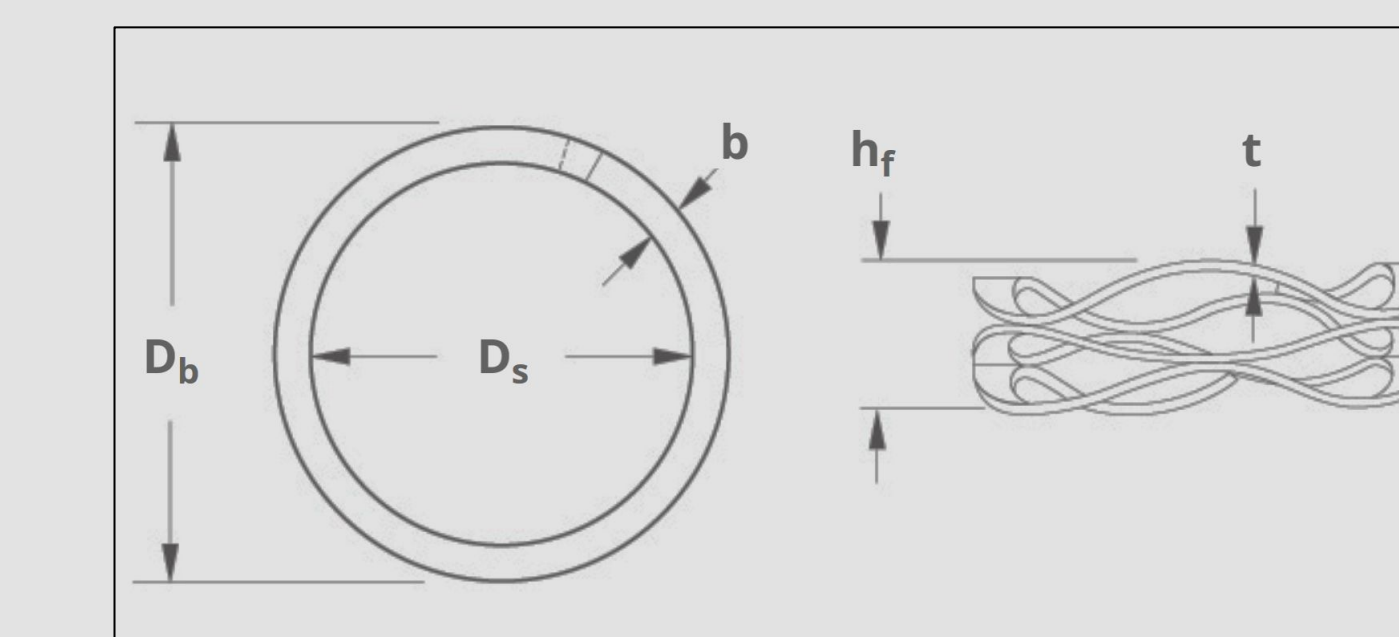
Technical drawing of the C037-L1 spring used in the final prototype [14].
